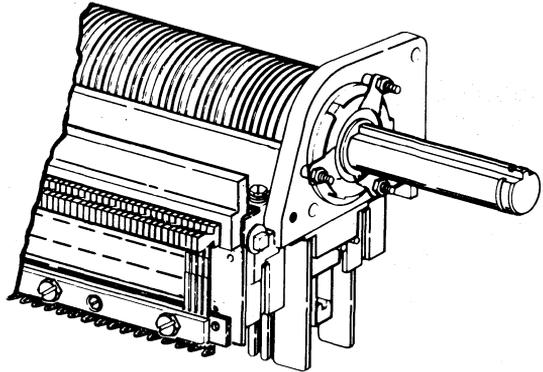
Print Head Assembly (Tractor Feed - 132-Column) (Late Design)
